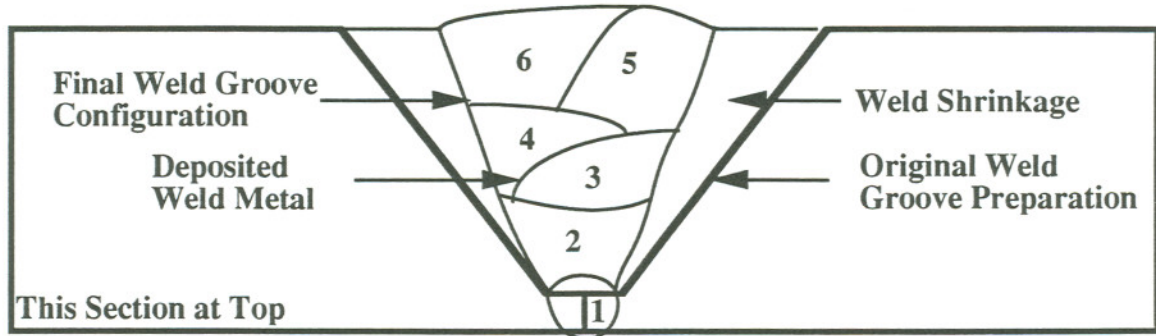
Six-Pass Weldment Pass Sequence
